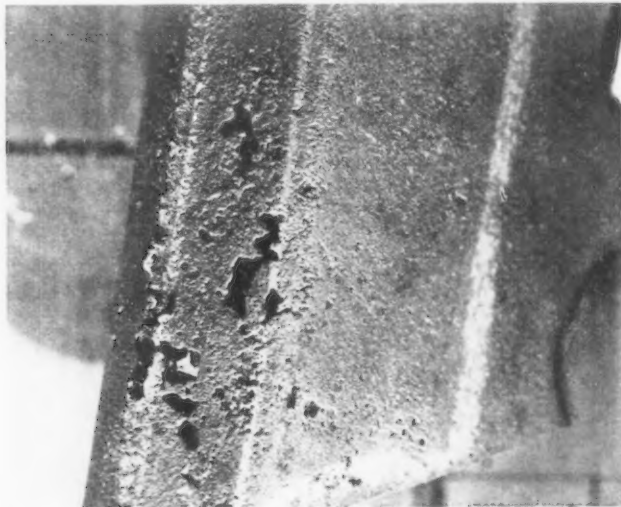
Casting defect showing molding sand inclusions as dark centers of definite shape around which metal flows. Defect caused by soft ramming around bottom of sprue and space between flask and sprue. The sand broke away from the sprue and was washed by the swift current of iron from the sprue and gate. When the current of metal was reduced, the sand was deposited in the mold. Note that the gate is not washed.
